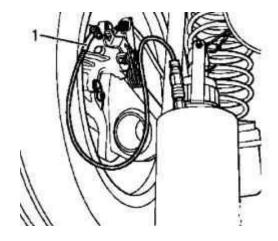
Removal of air from the brake system: 1 - hose to remove air
